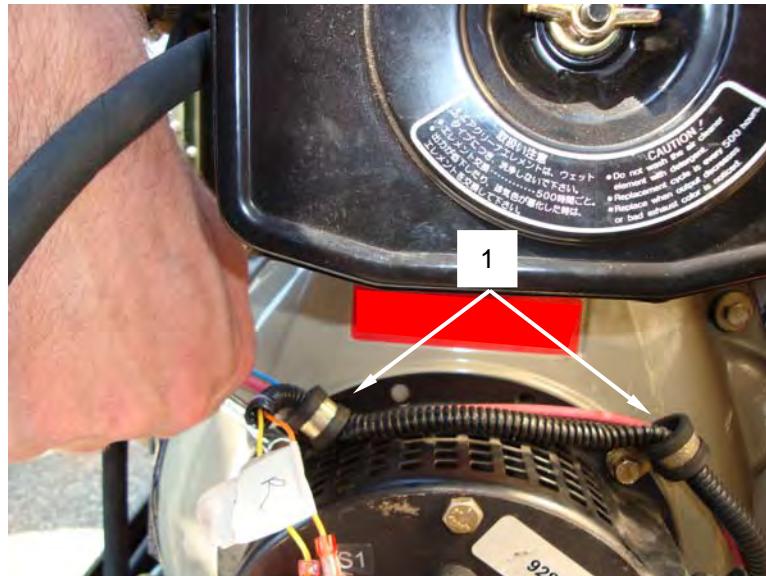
Remove Harness from Burner Fuel Pump Housing.
